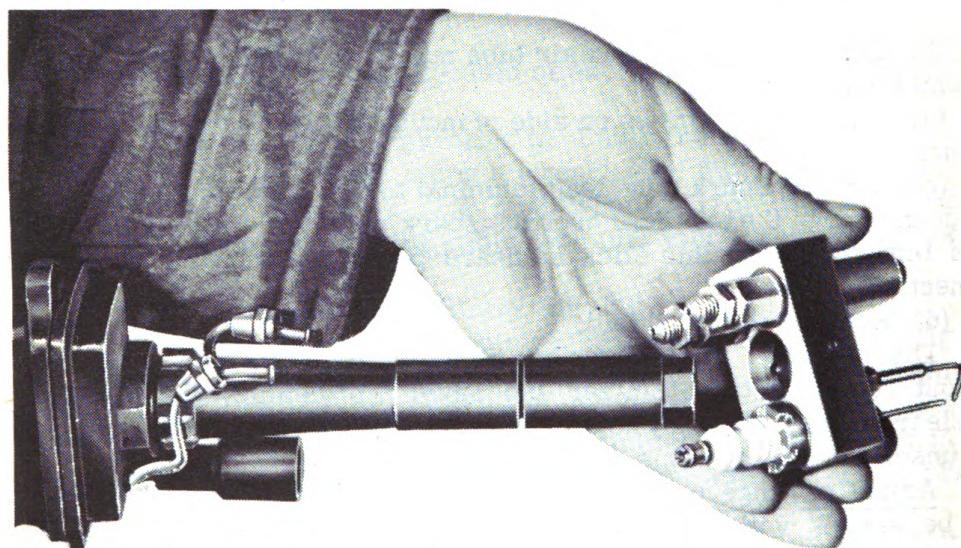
Removing atomizer assembly from fuel nozzle assembly.
